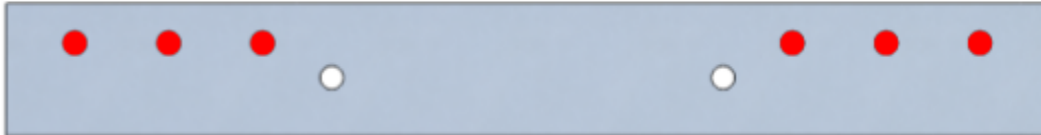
The mounting holes for the hinges on the front bracket, marked in red.
